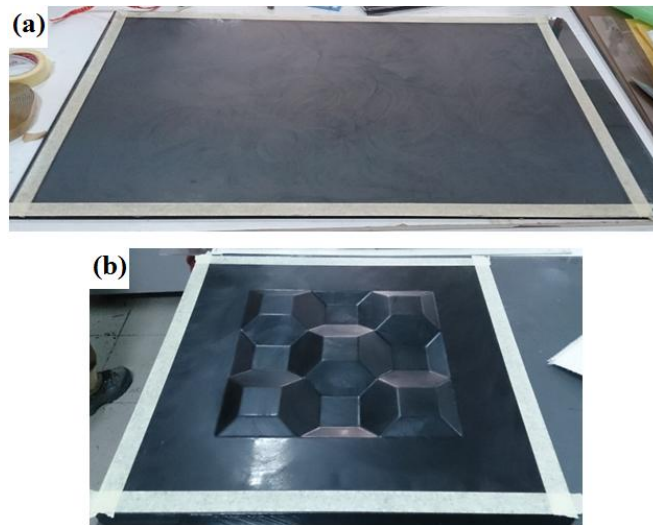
The waxed (a) glass-plate mold and (b) core-mold surfaces.
